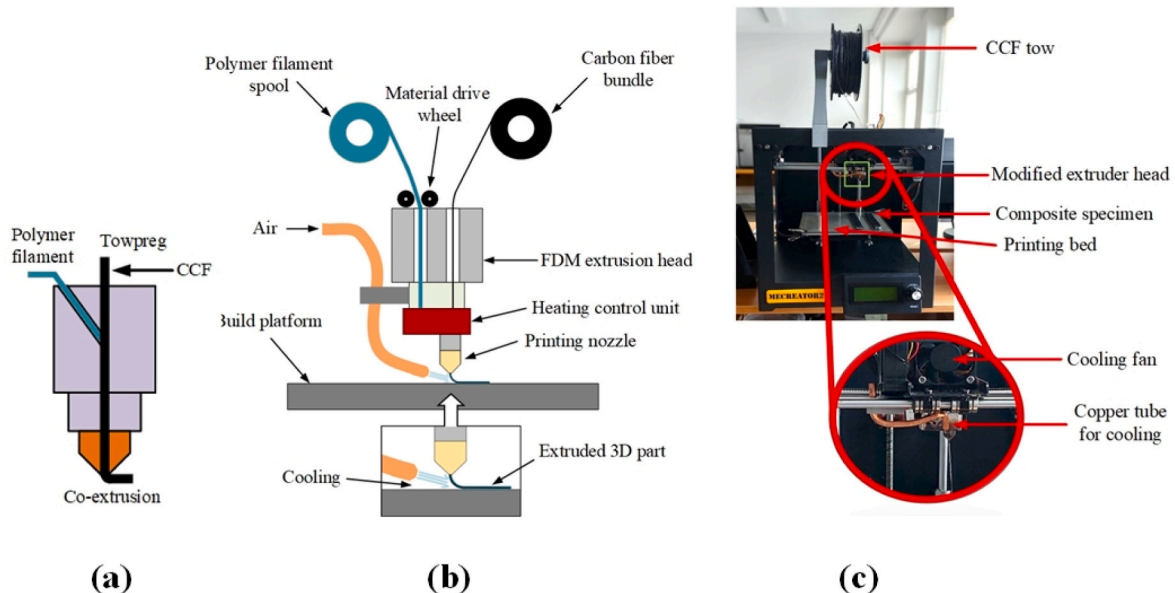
Schematic of (a) co-extrusion with towpreg process, (b) the designed FDM 3D printer, (c) machine used for fabricating composite structures.
